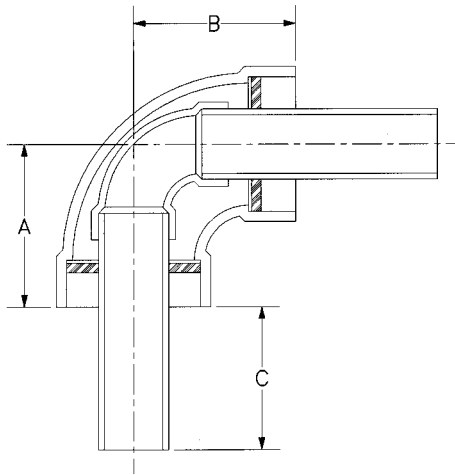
Typical thermoplastic 90° elbow combination for parts using socket-type joining systems whereby the carrier elbow is a single 90° elbow. (*Orion Fittings, Inc.*)
